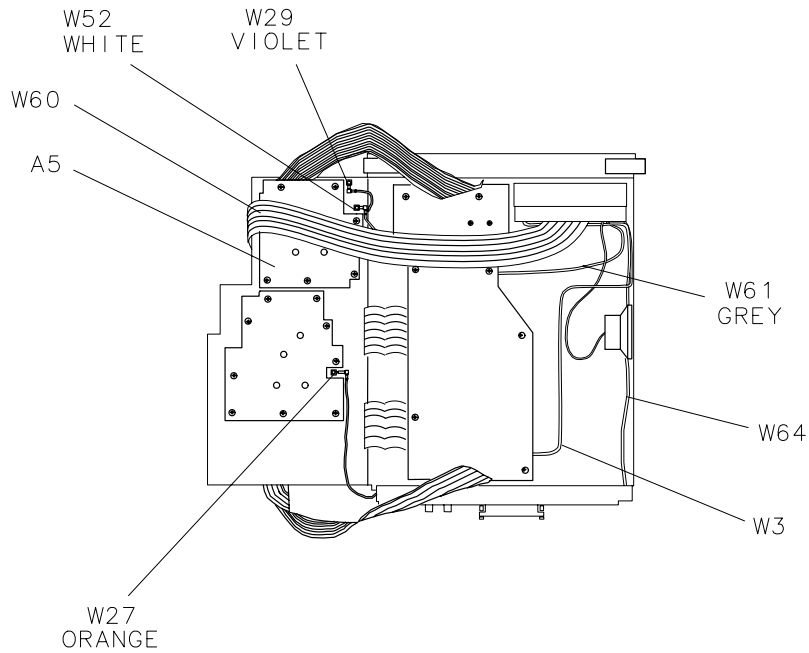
Assembly Cables (1 of 3) – EC- Series
